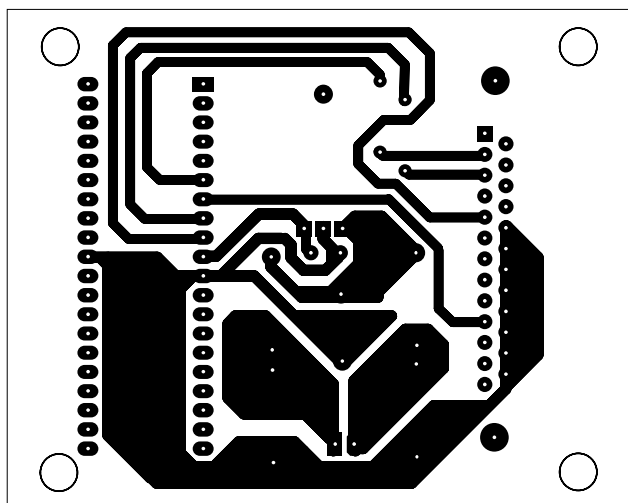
Actual-size, single-side PCB layout for AVR programmer (Pod)
